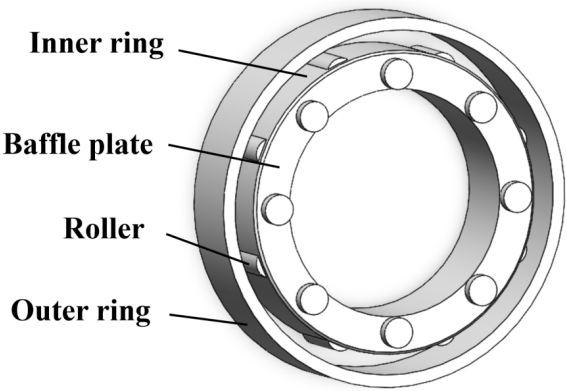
Cylindrical roller bearing without retainer CN215805741U.
